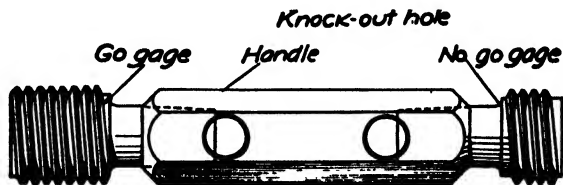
Double-end Taper Insert Thread Plug Limit Gage.
